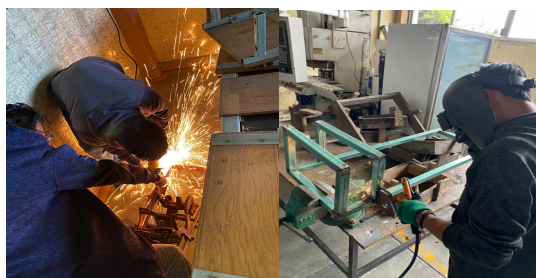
Electromechanical Engineering students cutting and welding the furrower according to the previously prepared design. Source: Own elaboration
